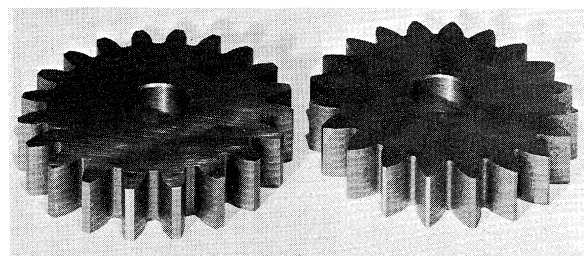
Hobbed 4-DP, 5-in. PD, 20-tooth gears with 20° PA, left, and 30°-PA, right.
